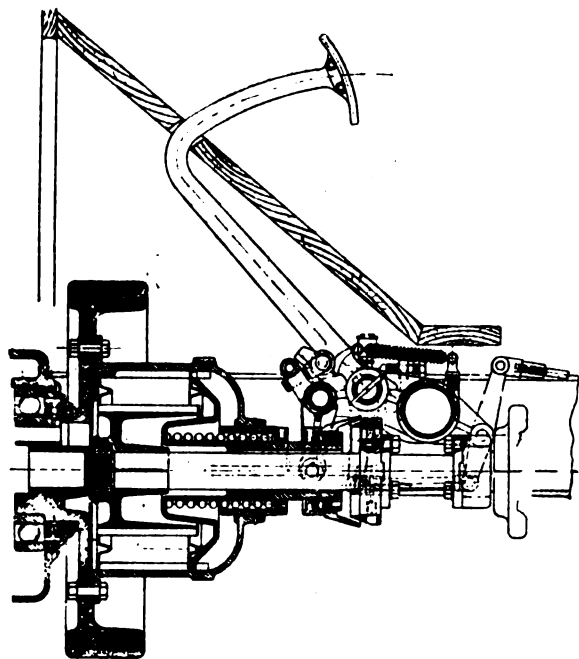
Sectional View of Clutch of "Sheffield-Simplex" Six-Cylinder Car and Operating Gear of same.
